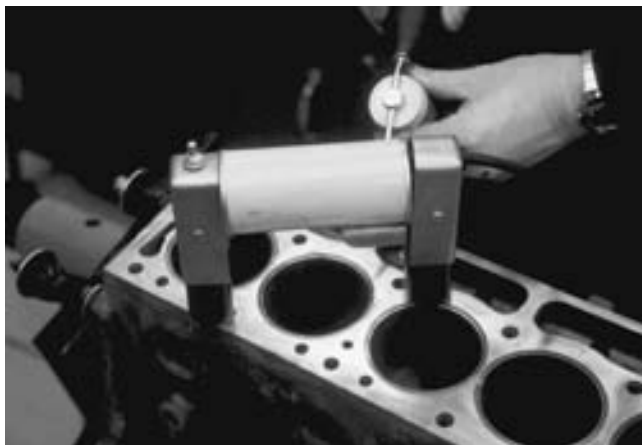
The top deck surface of a block being tested using magnetic crack inspection equipment.
